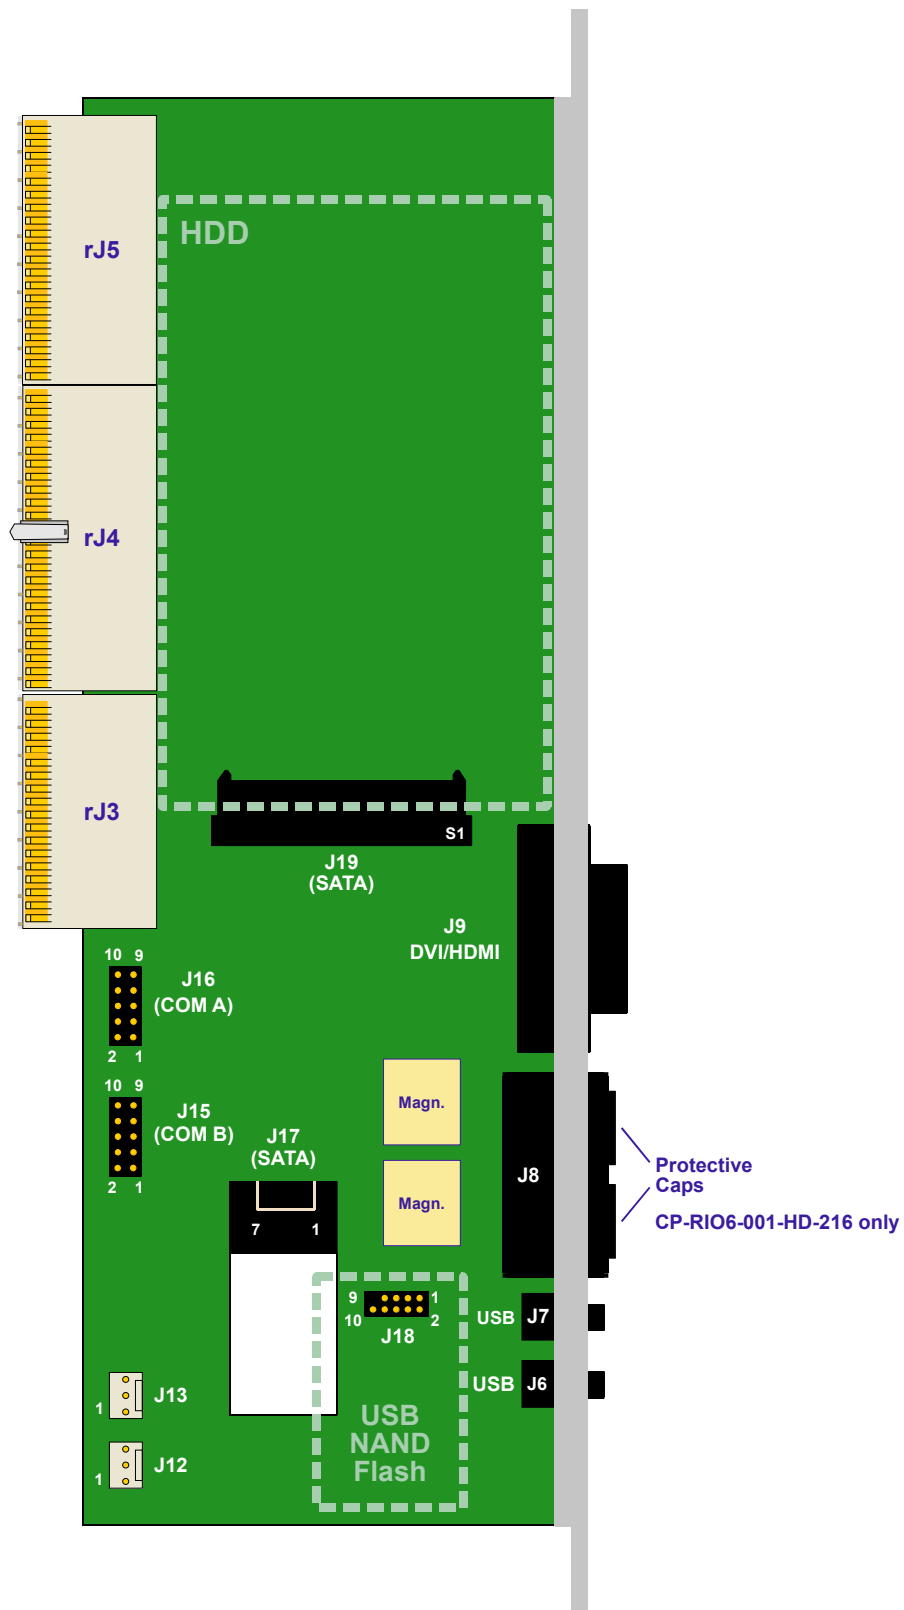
CP-RIO6-001-HD/CP-RIO6-001-HD-216 Board Layout – Front View
